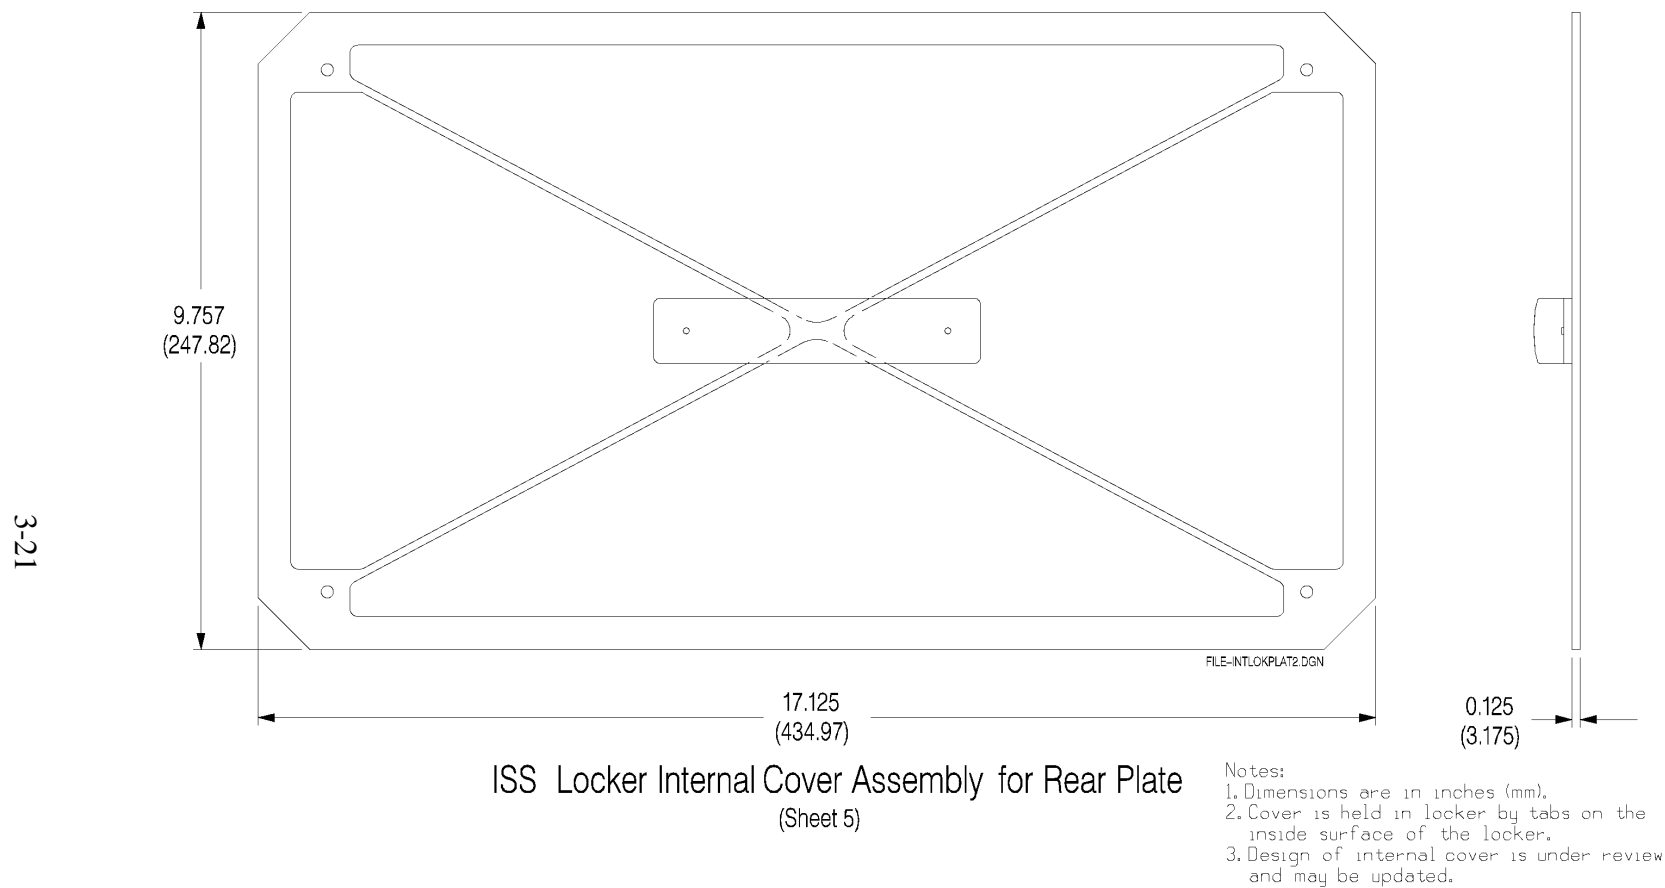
A ISS LOCKER INTERNAL COVER ASSEMBLY FOR REAR PLATE (Sheet 5 of 5)
